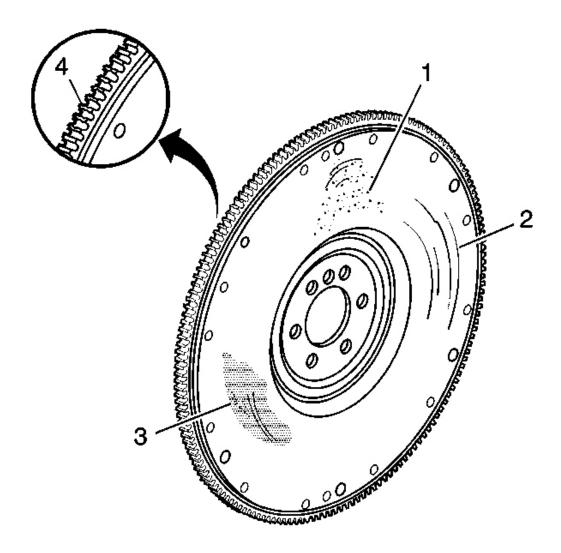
Flywheel Inspection Areas (Manual Transmission) Courtesy of GENERAL MOTORS CORP.
